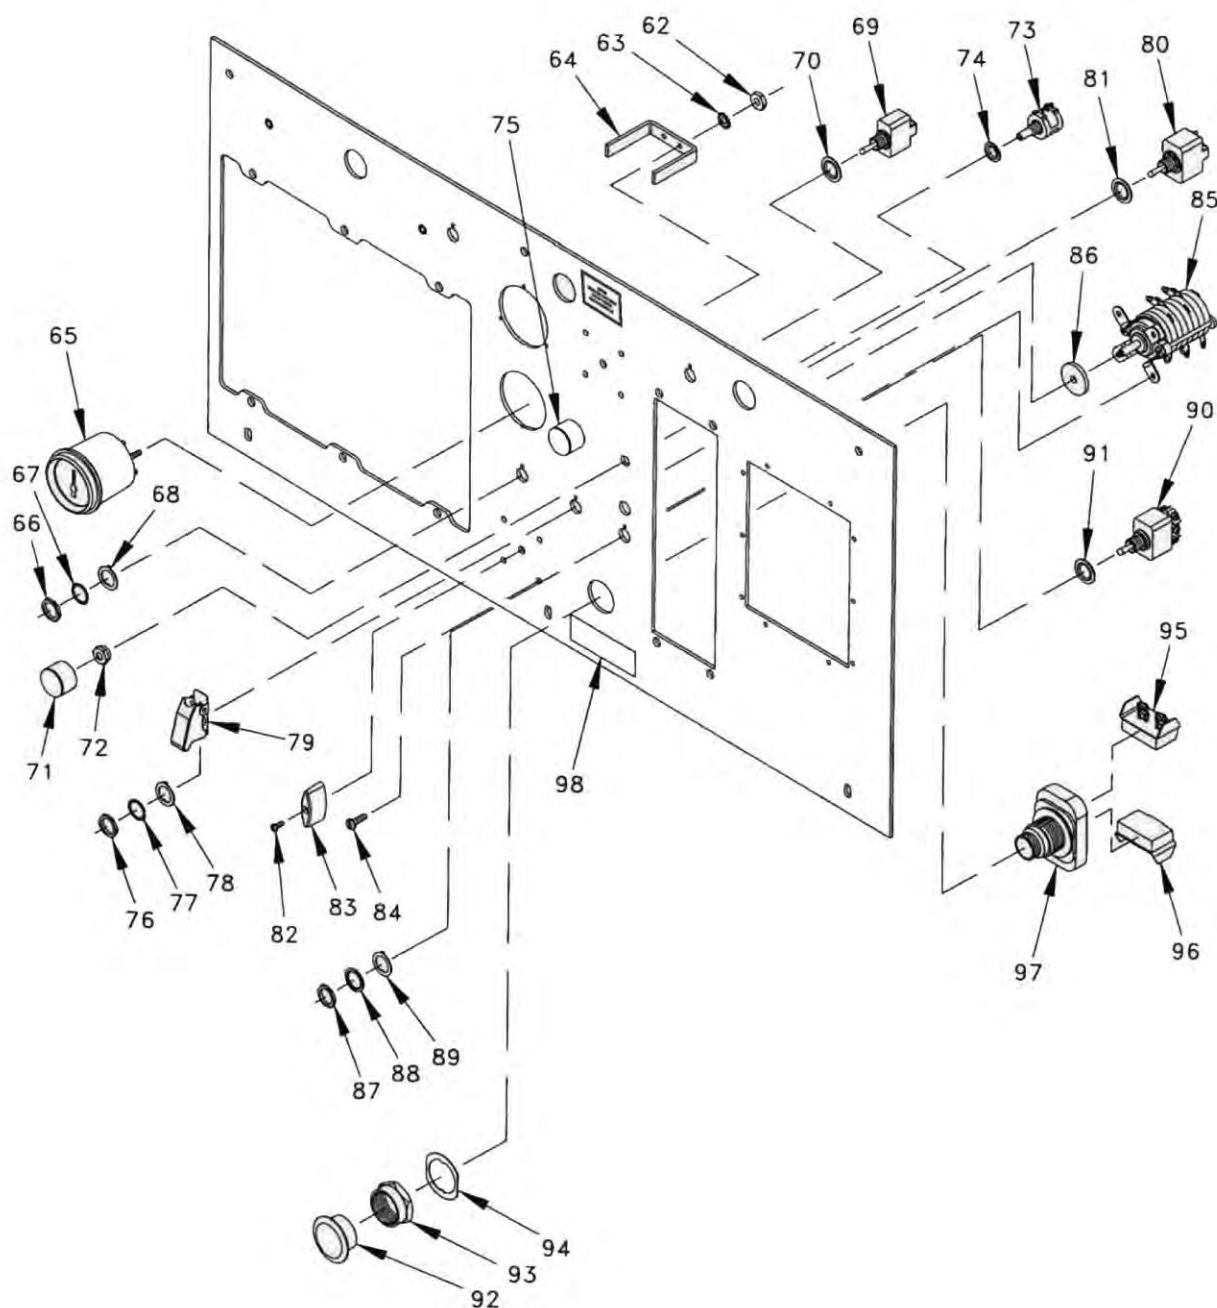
Control Box Panel Assembly (Sheet 4 of 4).
